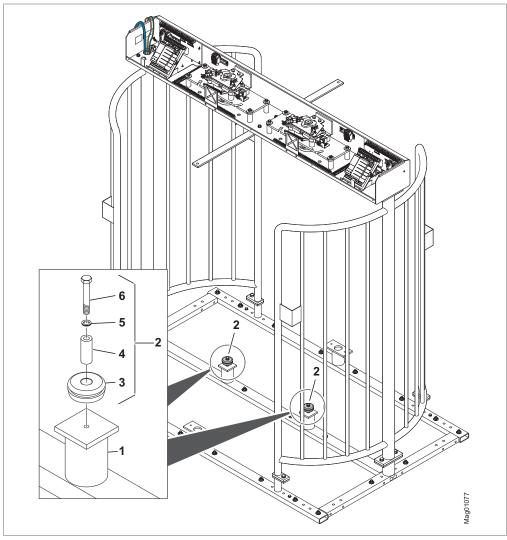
Mounting the floor bearing (plastic bearing, sleeve, washer and hexagon head screw)
